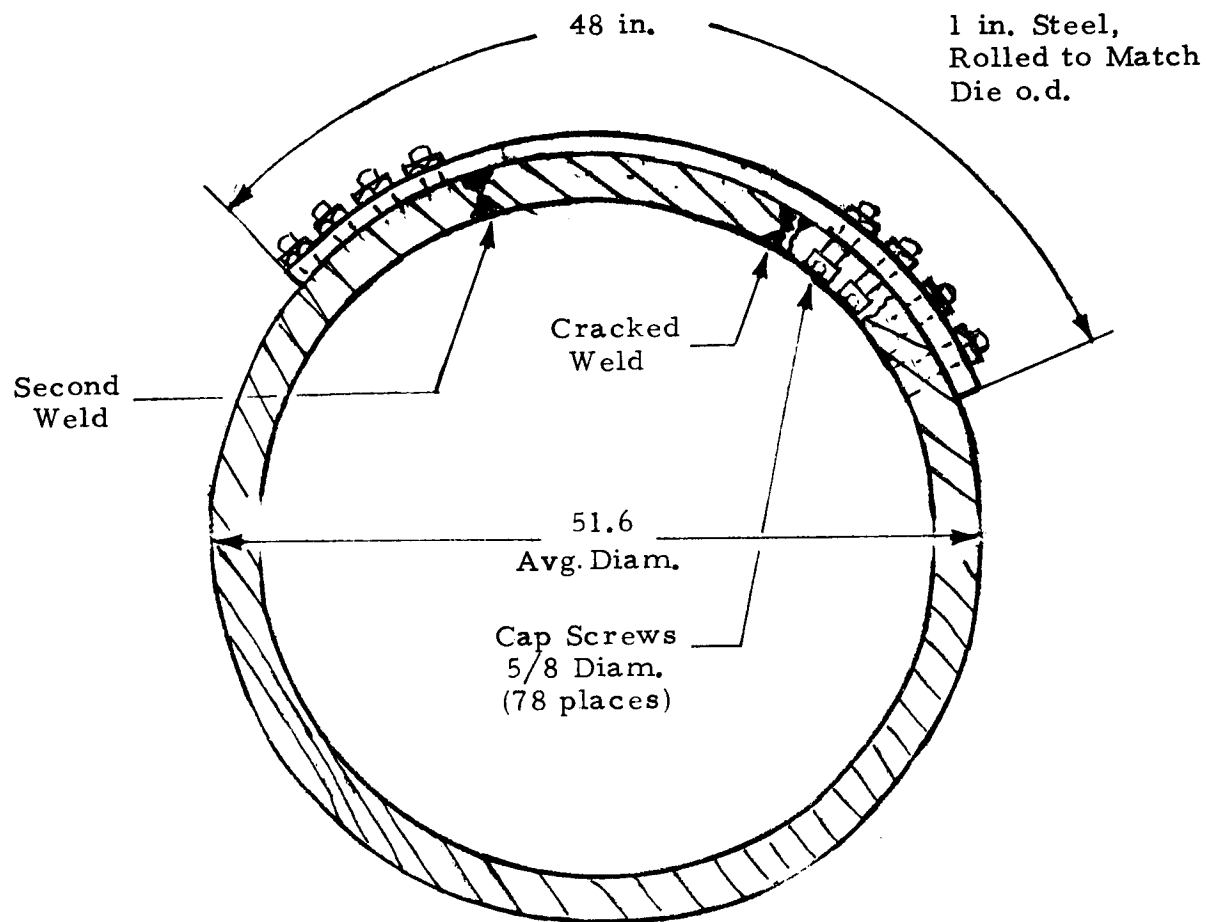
Sketch of Brittle Fracture of Weld at Approximately 4000 psi Tensile Stress in Die
